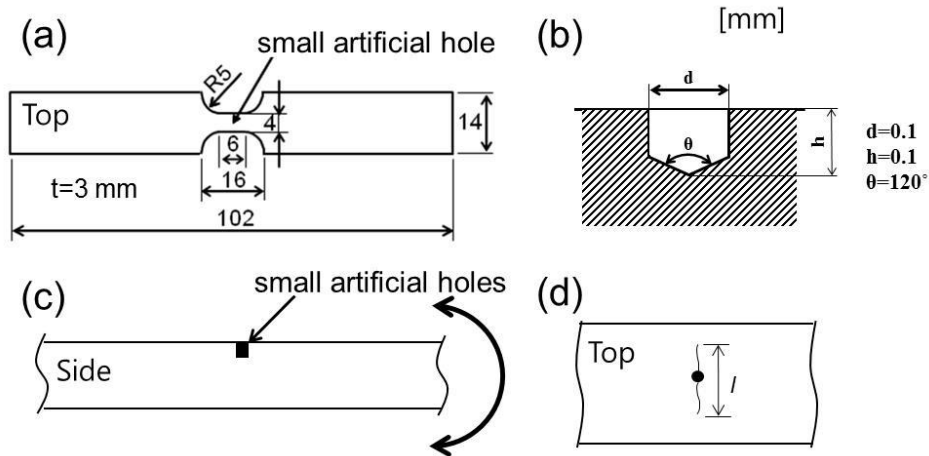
(a) Top view of the sample geometry used for the fatigue tests. (b) Detailed schematic of the shape of the drilled hole that is indicated in (a) ( $d$  = diameter,  $h$  = height). (c) Magnified side view showing the position of the drill hole and the loading direction. (d) Definition of the crack length ( $l$ ) that was used in this study.
